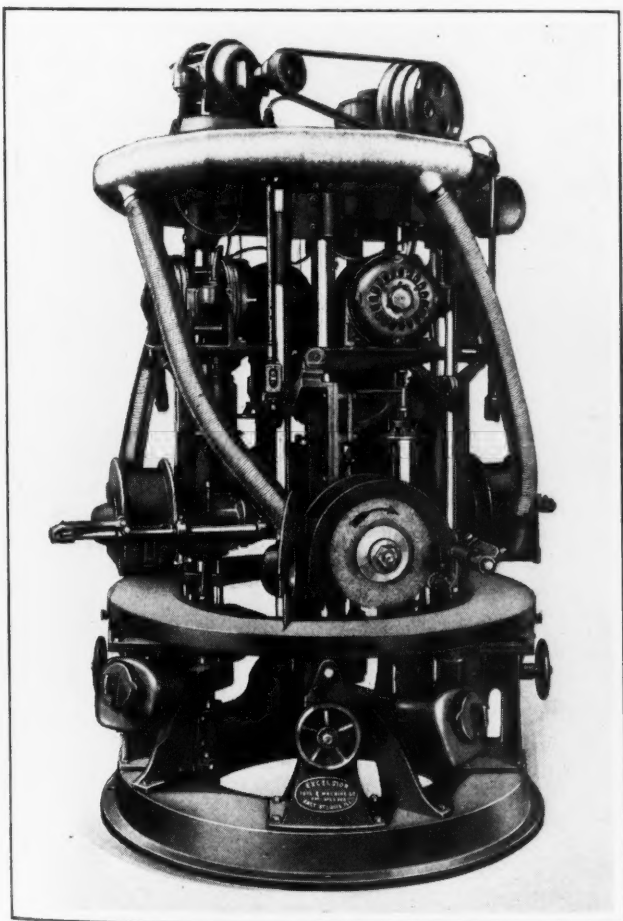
Excelsior Continuous Rotary-feed Grinding, Polishing, and Buffing Machine
